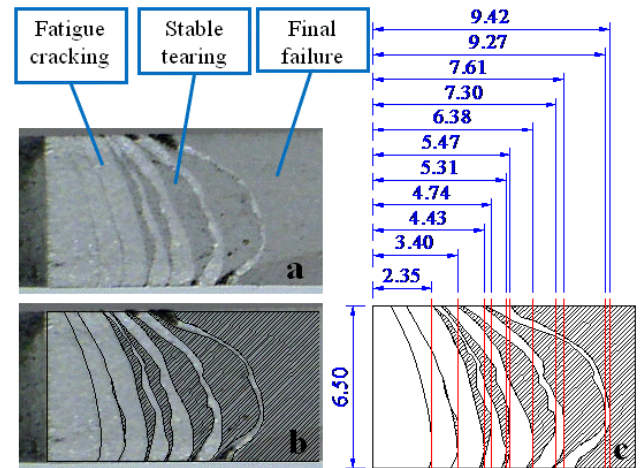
Examination and measurement of tearing on fracture surface (specimen H); (a) macrograph of fracture surface captured by digital microscope, (b) sketch of tearing in CAD program and (c) measuring the crack depth, a . Crack growth is from left to right.
